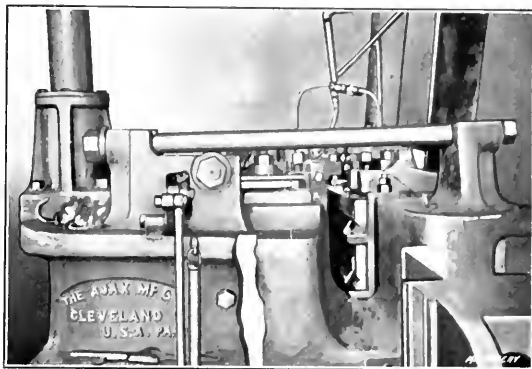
Ajax Forging Machine used for upsetting the ends of the axle
